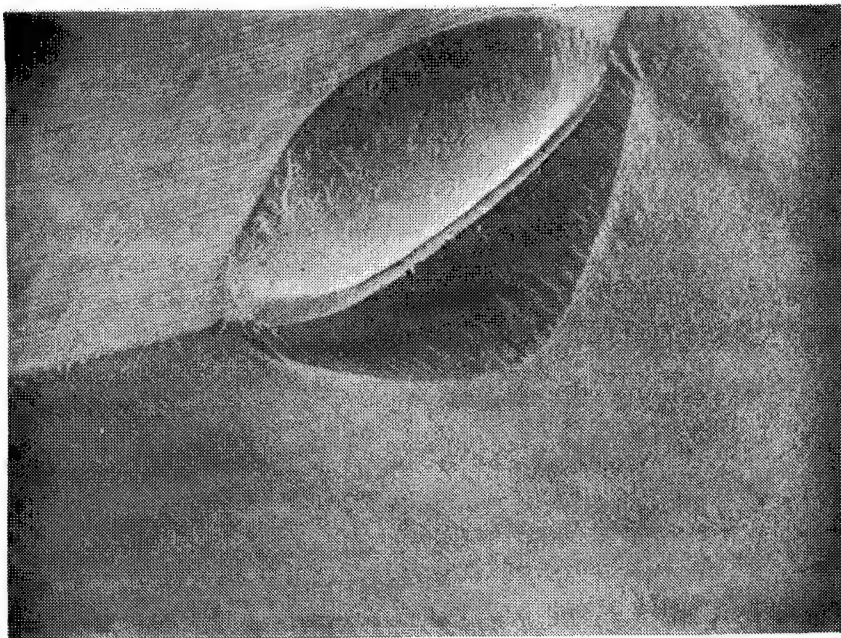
Photograph of a Typical Turning Test Tool for Fluid #2.
